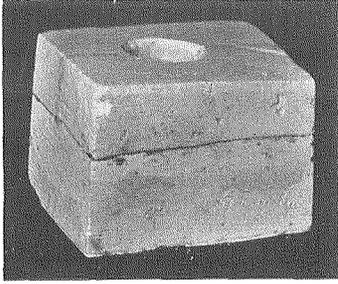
Matrix Assembled, Showing Cervical Opening
